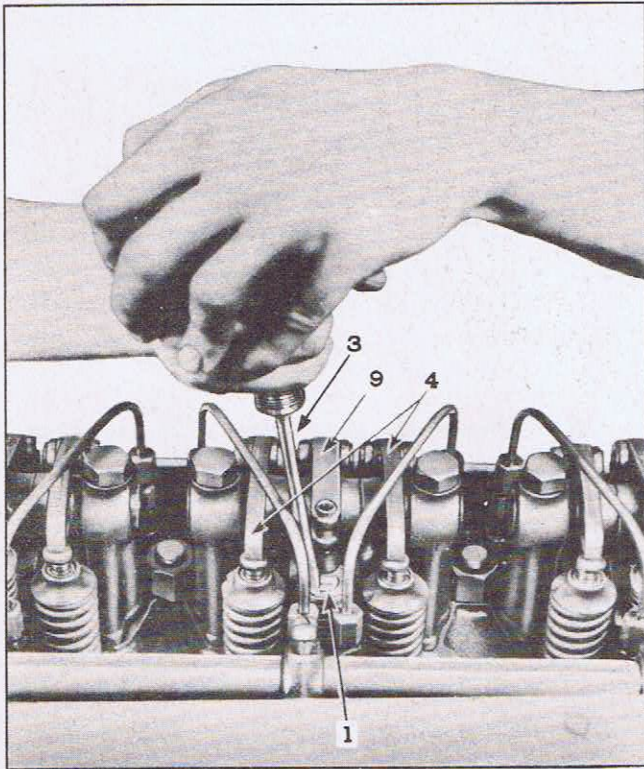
DEPRESSING INJECTOR FOLLOWER WITH SCREWDRIVER.
